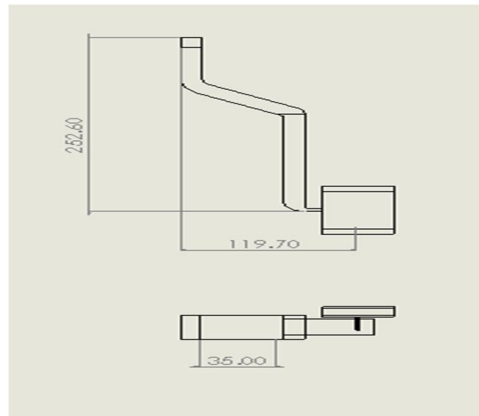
Drafting Three-wheeler electric vehicle brake pedal
